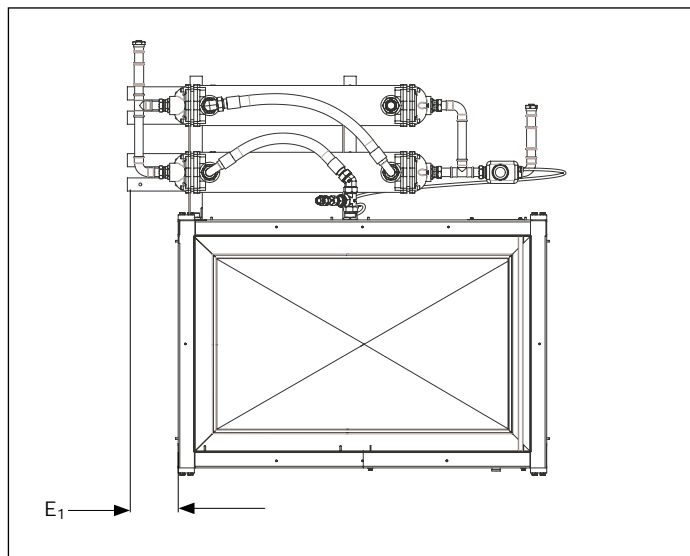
Hägglunds top view example DUe S2 series cooler size 400
